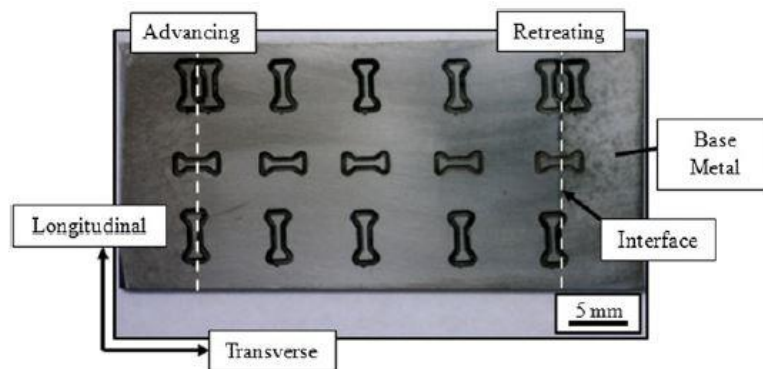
Microsample locations within the weld plan view slice [12].
